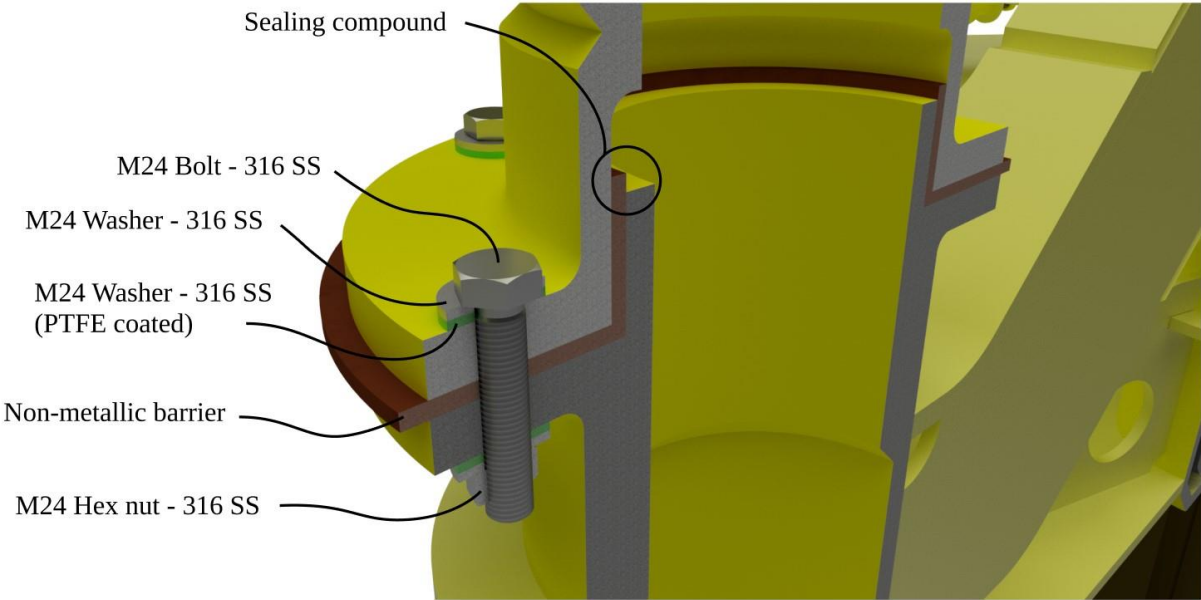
CAD Model - Flange Design Between the Steel- and Aluminum Module.
